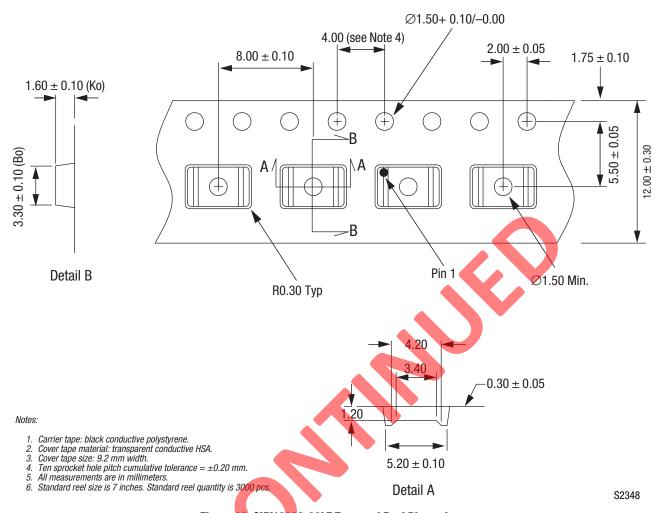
SKY12322-86LF Tape and Reel Dimensions
